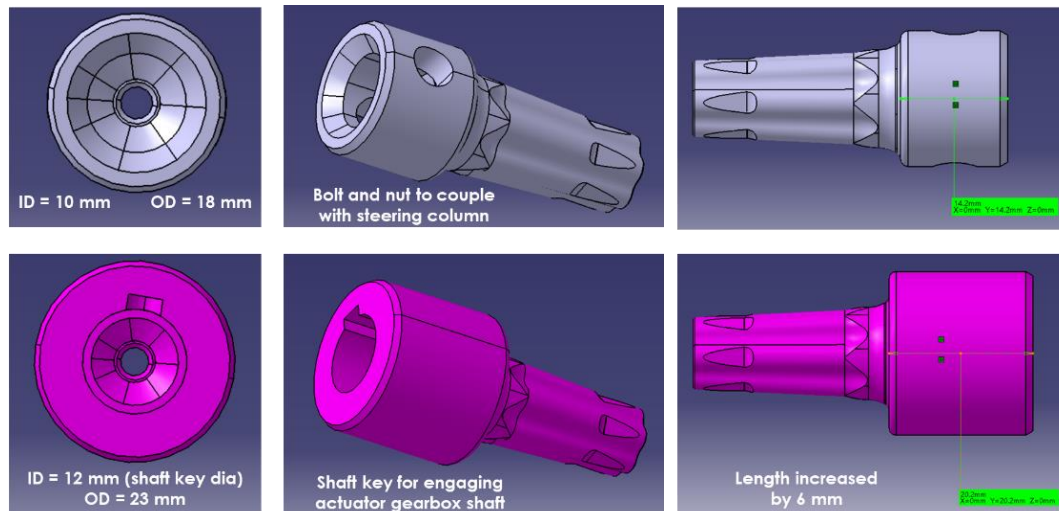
Existing (top) and modified (bottom) side lock pinion input shafts - Solution 5
